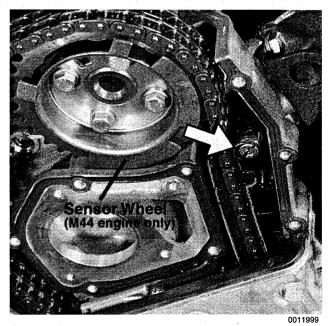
Chain guide and guide adjusting sleeve (arrow). Allen-head retaining screw has been removed. Use slotted screwdriver to loosen adjusting sleeve.
